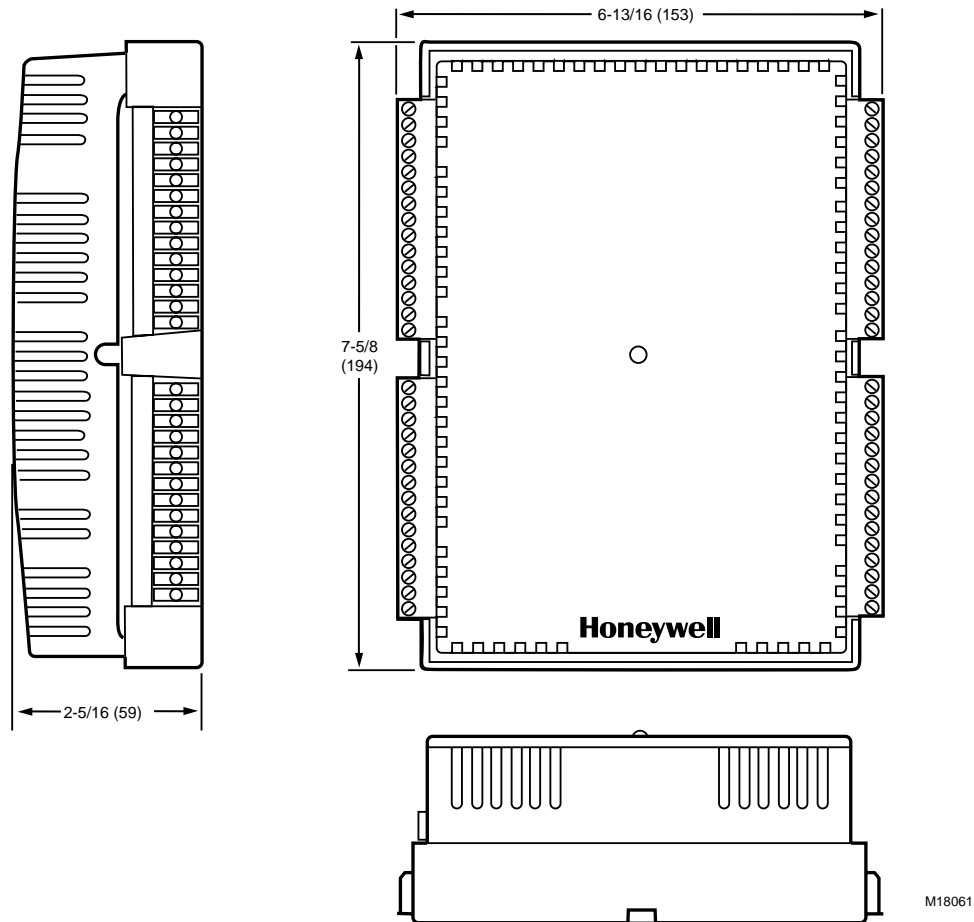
W7760C assembly mounting dimensions in in. (mm).
